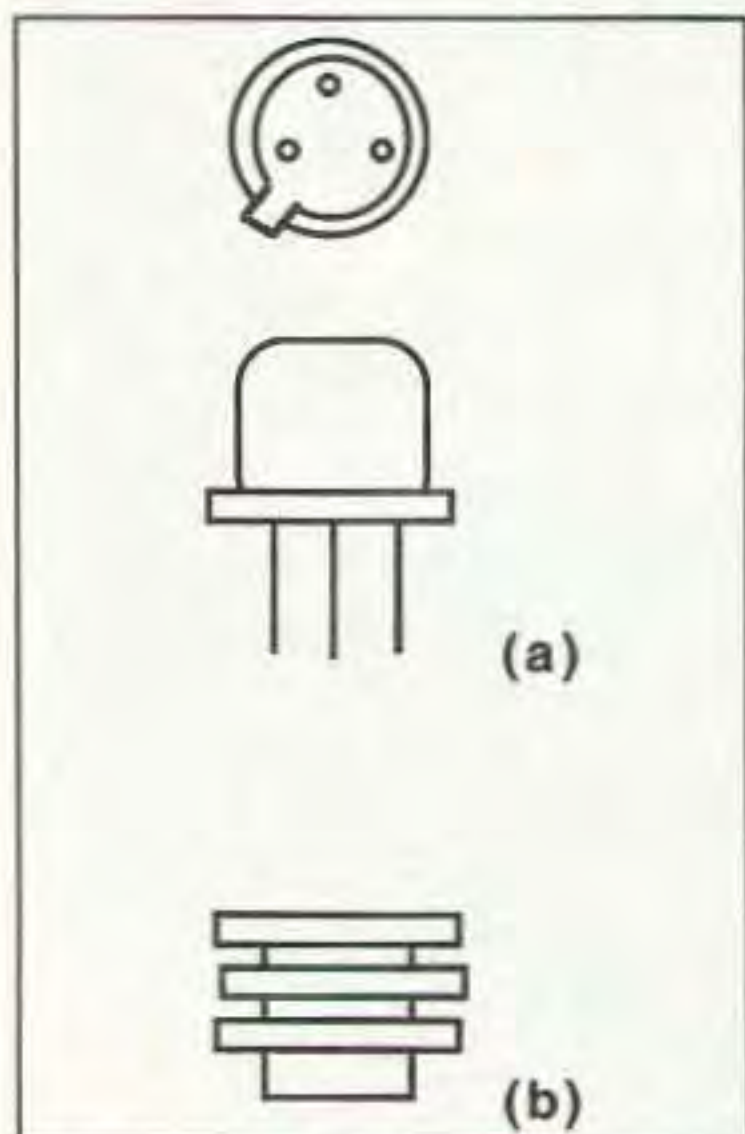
a) TO-5 transistor package; b) TO-5-style top-hat heat sink.
